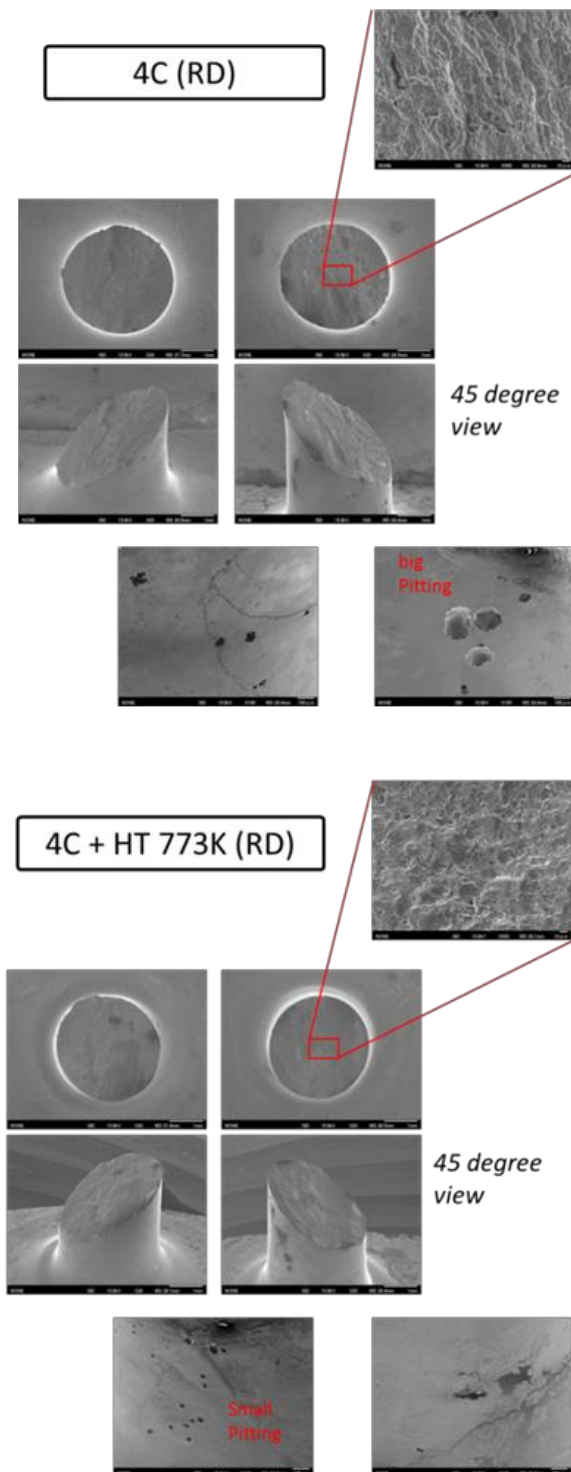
Fracture surface appearance on fatigue test of as-ECAPed and post-ECAP annealed sample.
